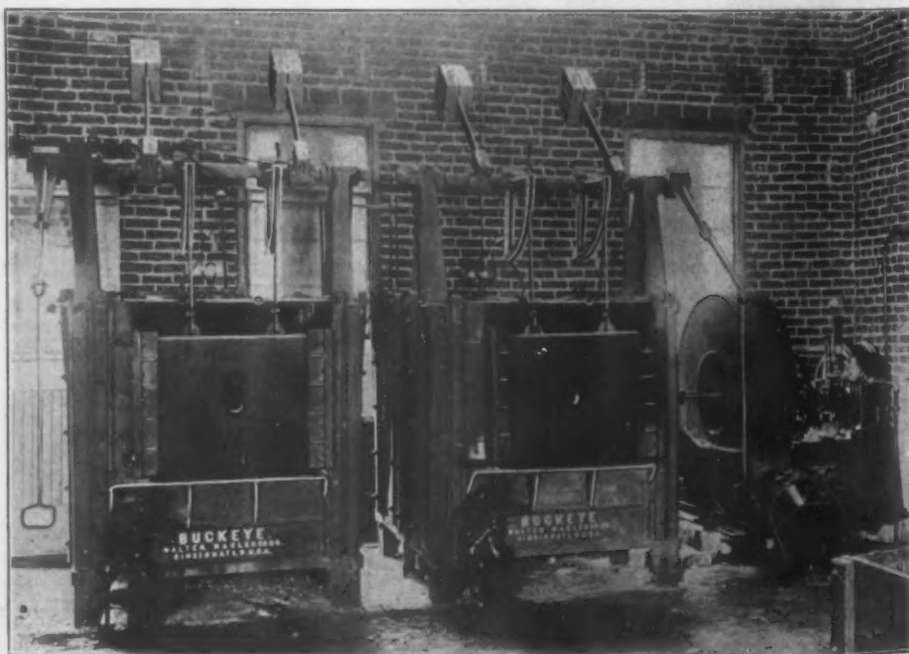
Two Oil-Fired Heat-Treating Furnaces.
